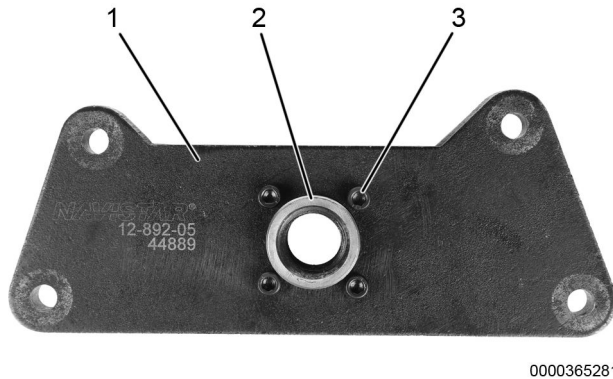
Removal Plate, Threaded Bushing, and Screws.
